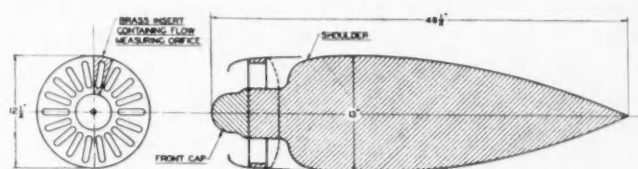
General Arrangement of Quarter-Size Wind-Tunnel Apparatus
